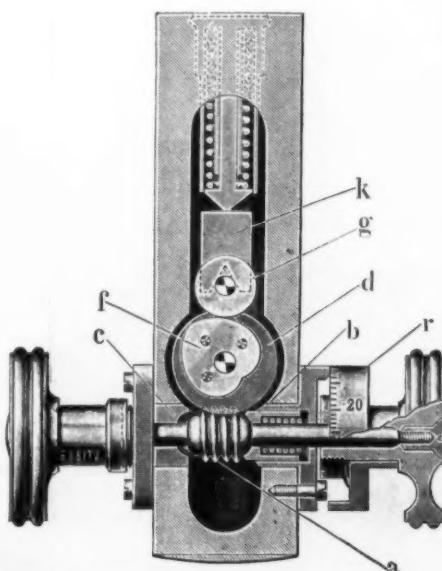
Berger Micrometer Screw Fine Adjustment.
